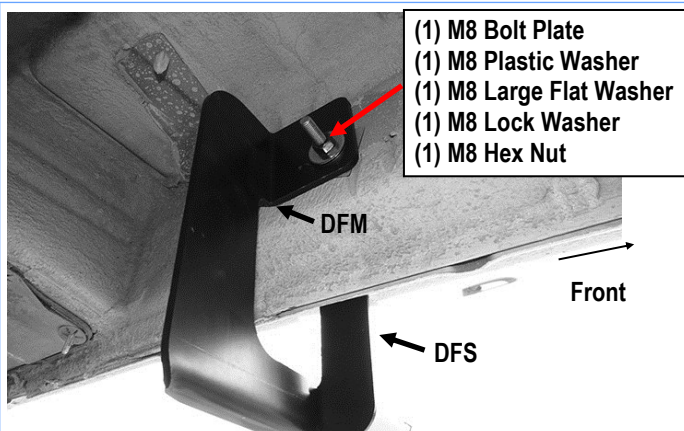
Driver Front Mounting Bracket (DFM) and the Driver Front Support Bracket (DFS) Assembly
